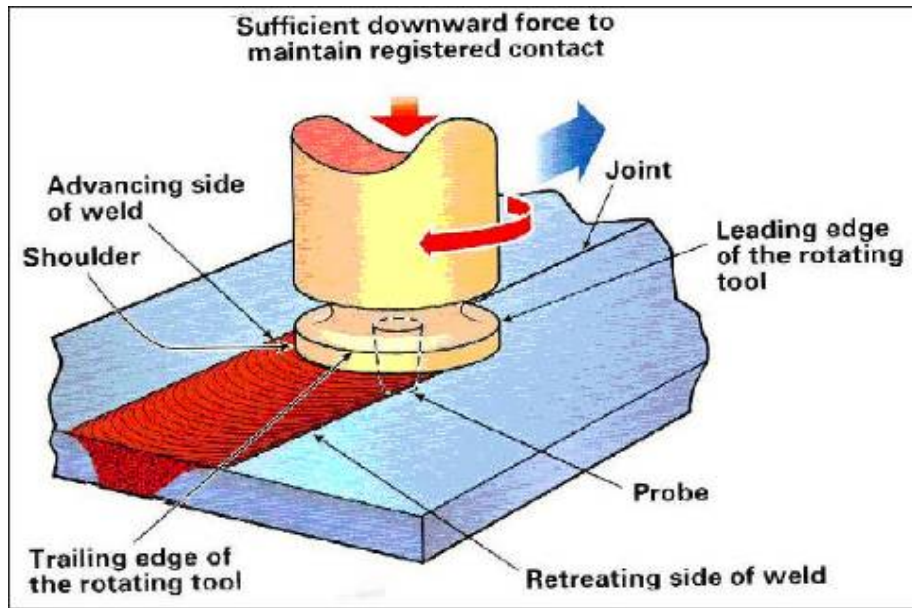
Typical butt joint being created by friction stir welding.
